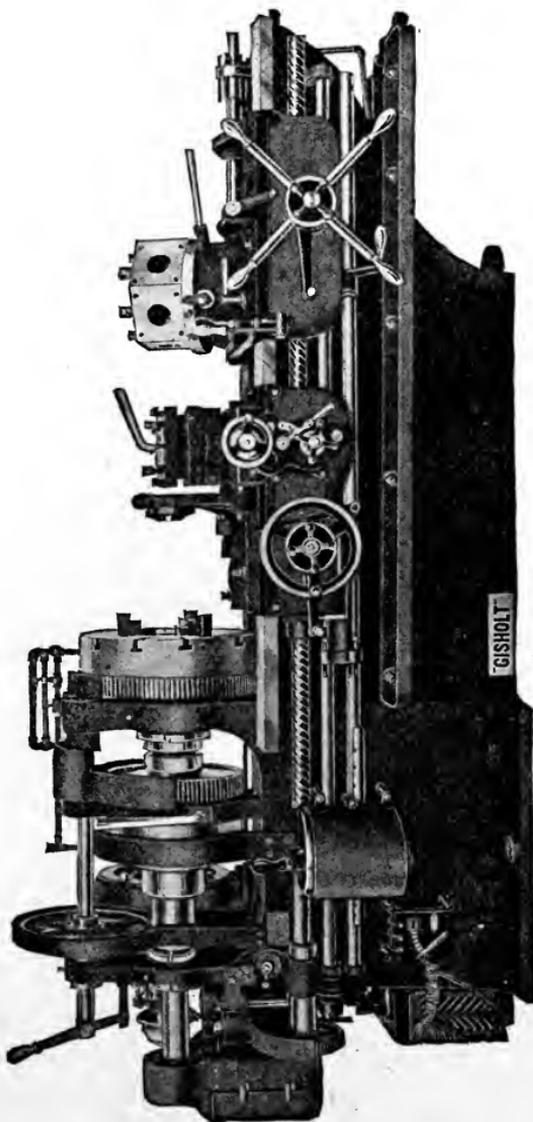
"1" 24-Inch Turret Lathe with Motor Drive
